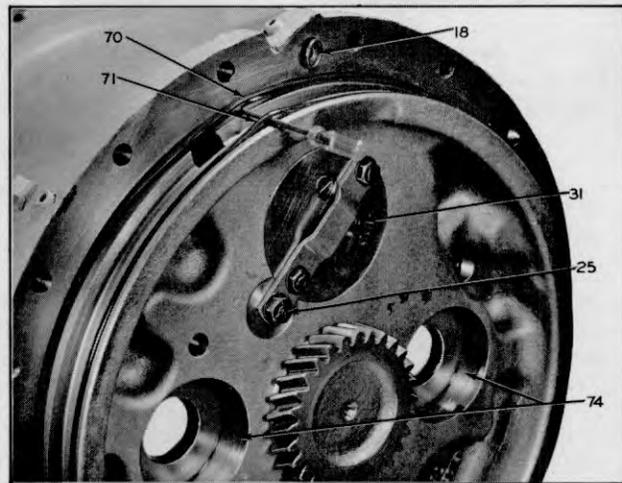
Transmission and Converter Housing Sealing Rings (Typical Illustration)
